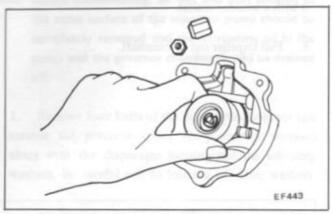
Removing governor spring assembly (in mechanical section)
